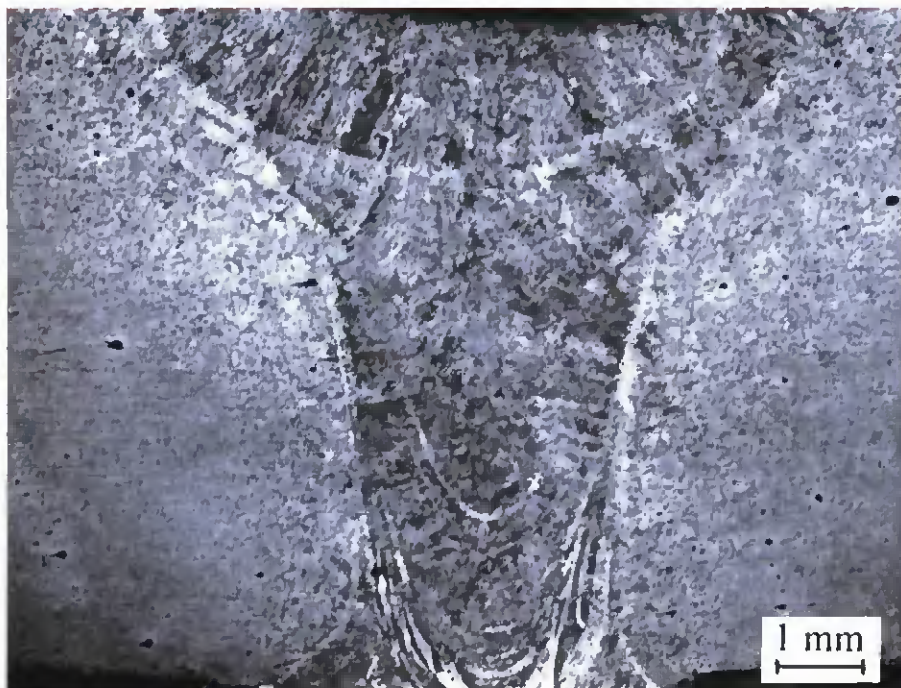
Cross section micrograph of a weld in a butt joint using TMFP flux cored wire plasma arc welding, 3-mm (0.12-in.) preexisting joint opening.
